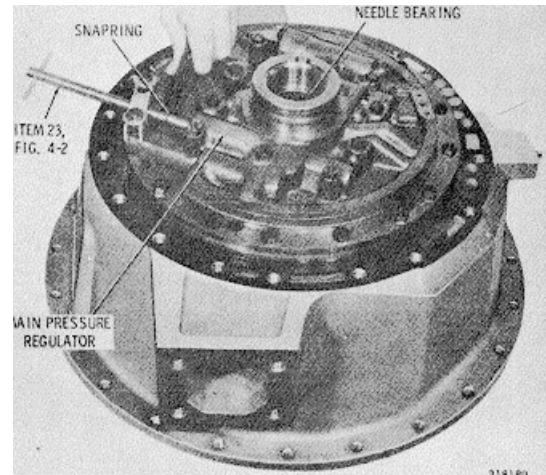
Removing (or installing) main pressure regulator snapping.
